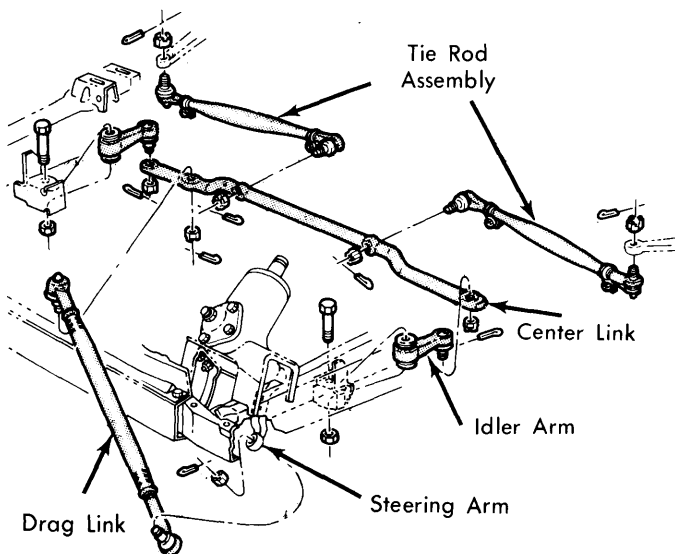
Disassembled View of Steering Linkage for "B", "CB", "MB" and "PB" Models
